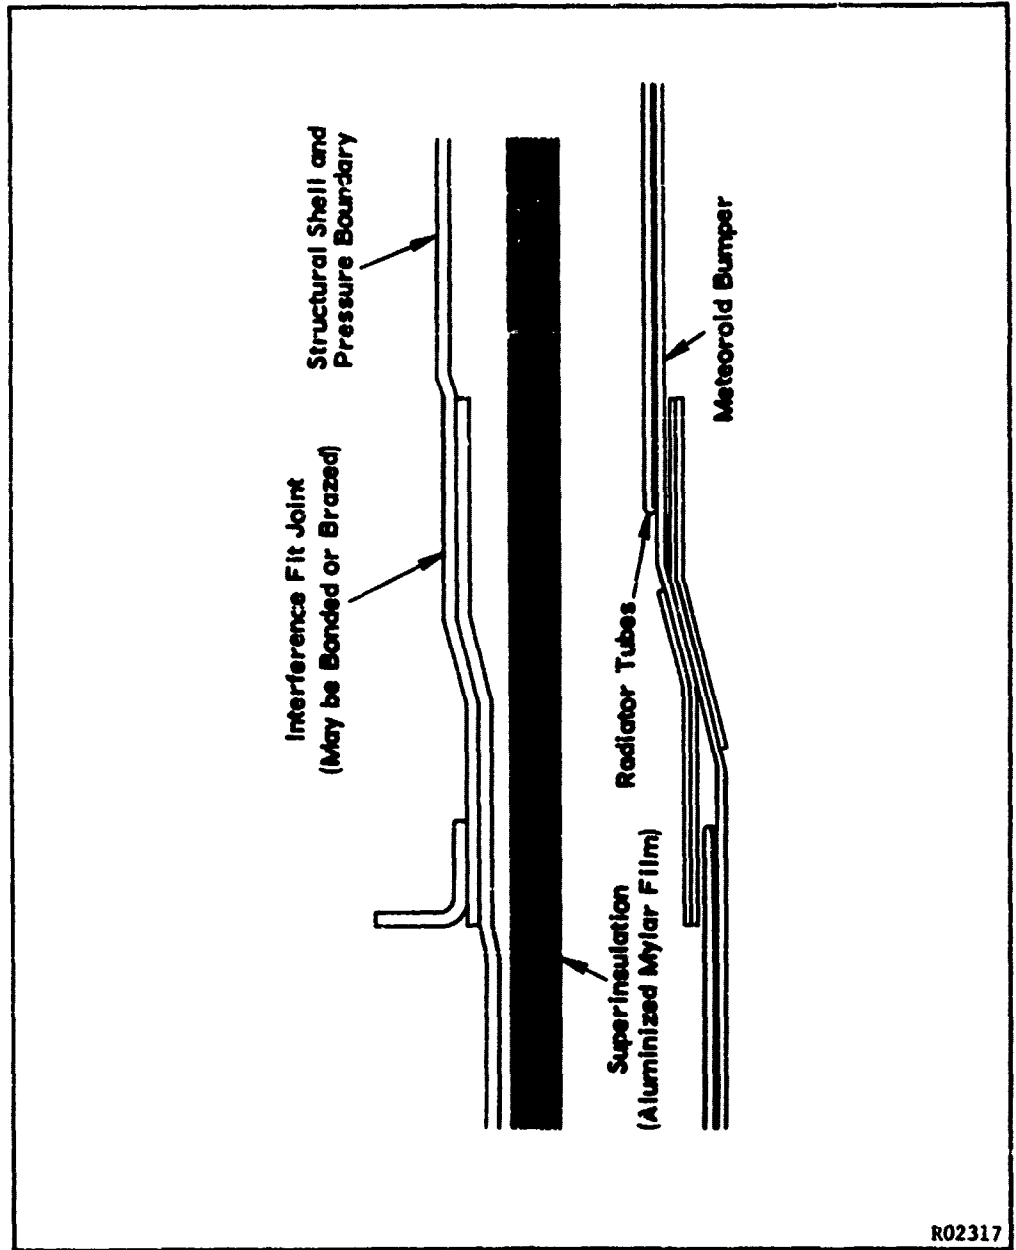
JOINT AND WALL CONCEPT FOR TELESOPING SPACECRAFT
